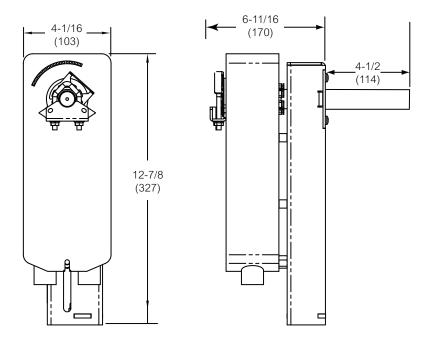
Mx41-715x-230 Actuator/Linkage Assembly
